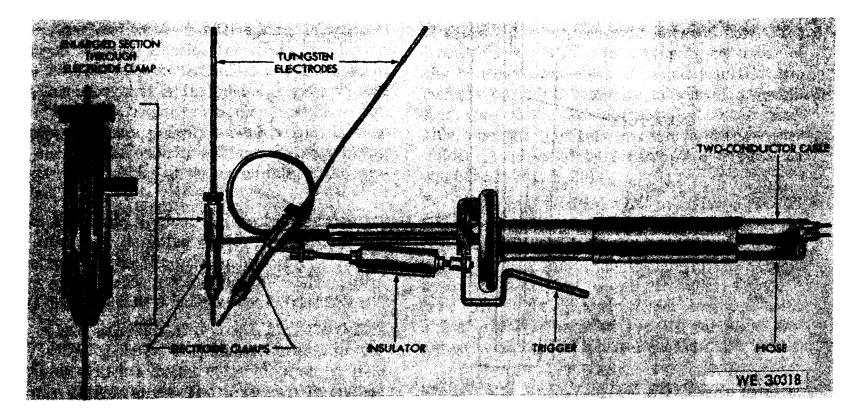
Atomic-hydrogen welding torch.
